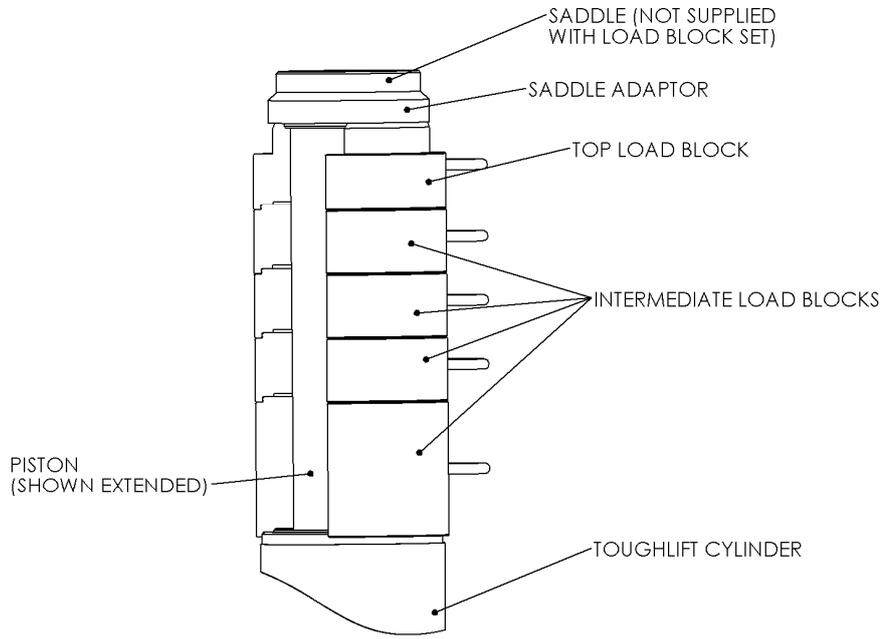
LOAD BLOCK ASSEMBLY (TYPICAL)
